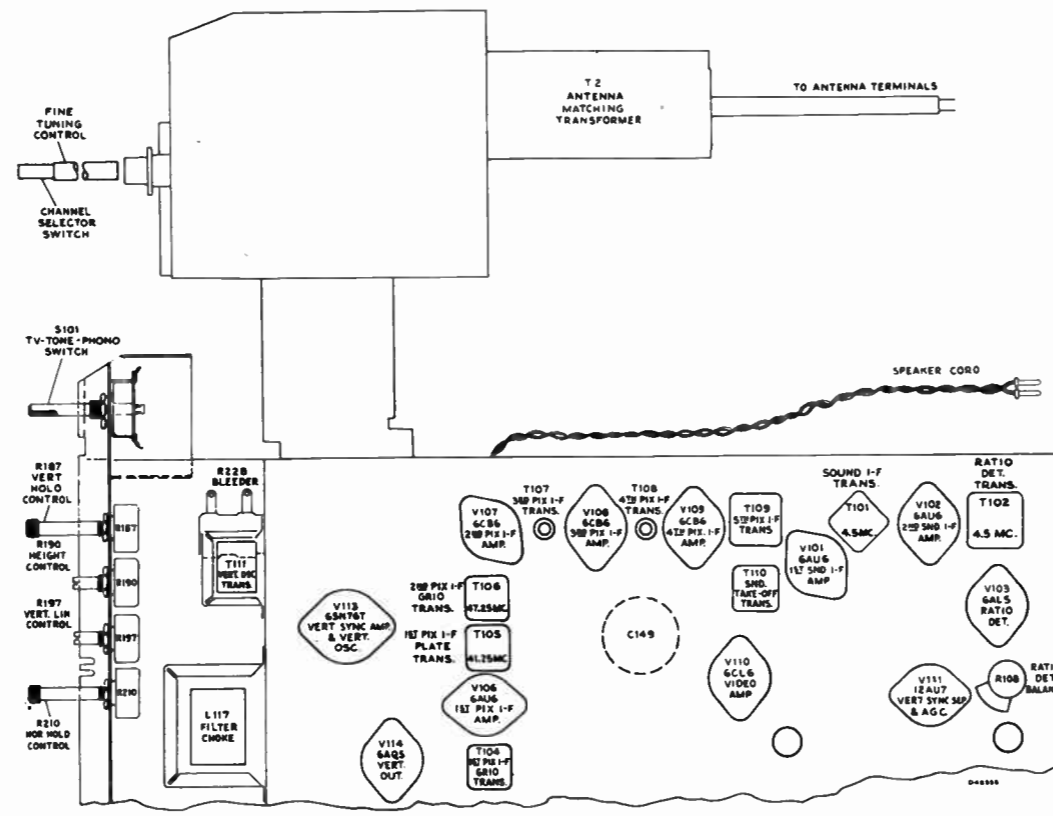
Bottom Chassis Adjustments (KRK11B Tuner Shown)
